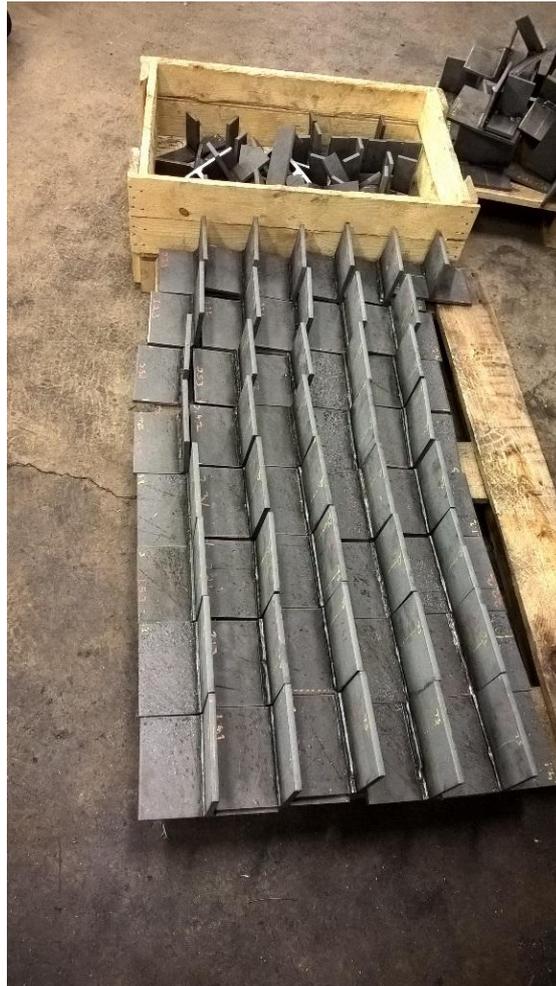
Test pieces cut to 150 mm length and ready for Carbon-arc gouging and breaking.
